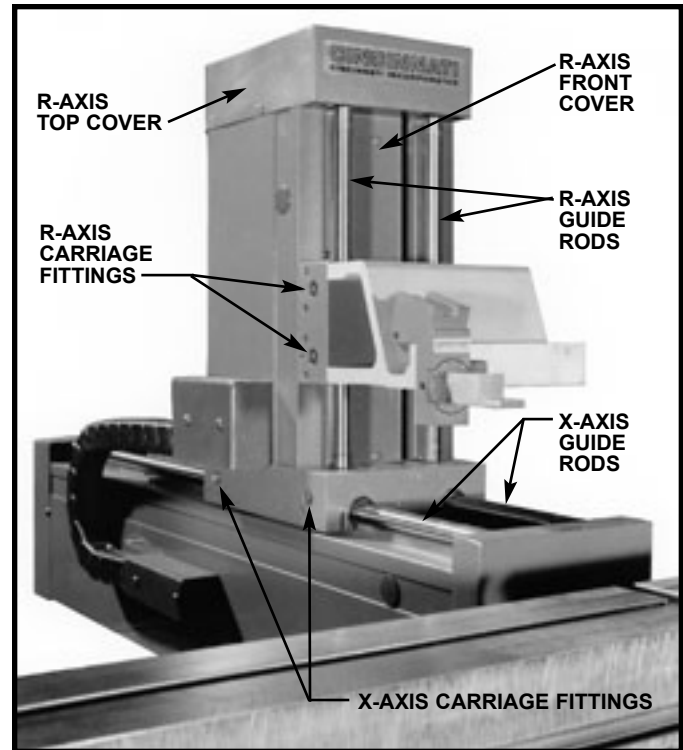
CNC Six-Axis Backgage (Front view)
